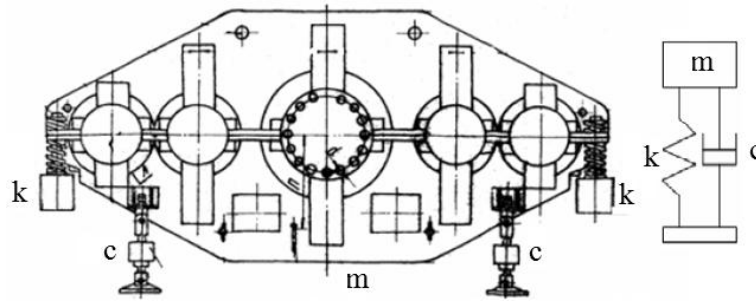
Reduction system (m), package of springs (k) and buffers (c)
